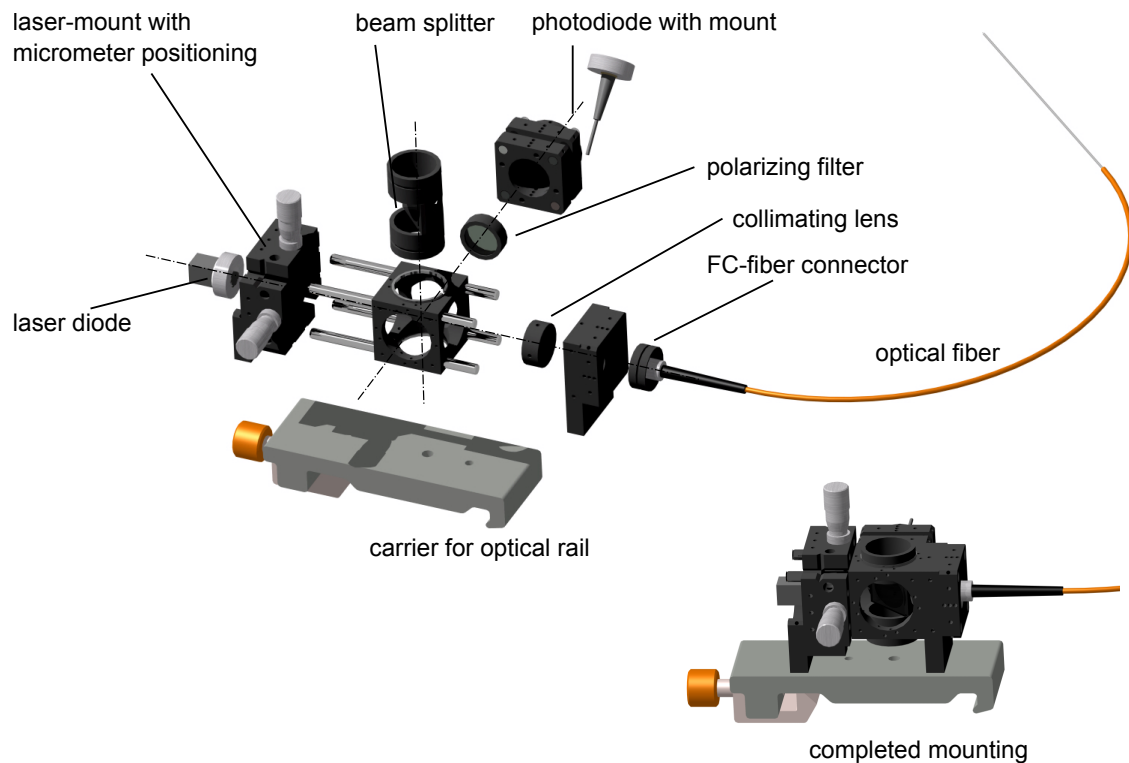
Exploded and assembly drawing of the optical setup for beam separation and detection.
